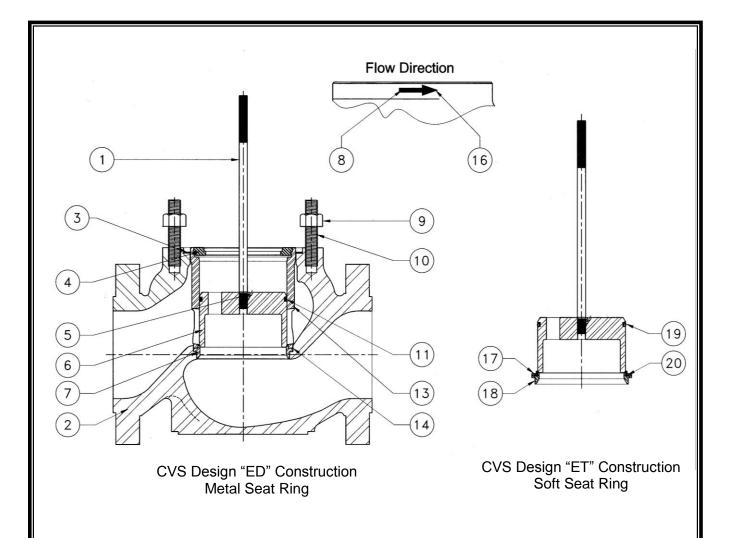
Body Assemblies, CVS Series E 8" Globe Valves,
